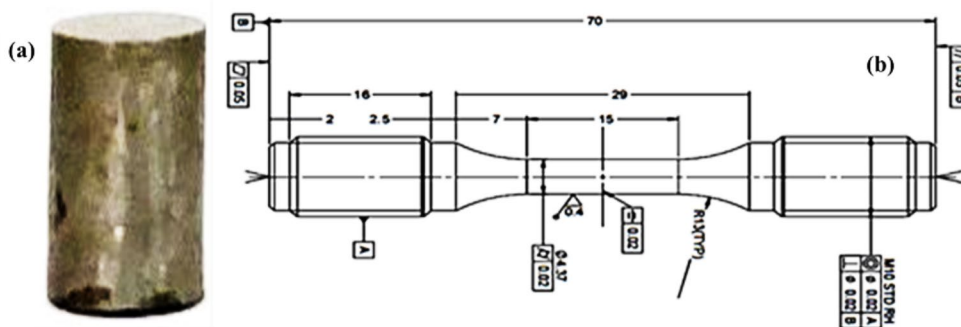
(a) Microstructure and Hardness test specimen (b) Tensile test specimen dimension
